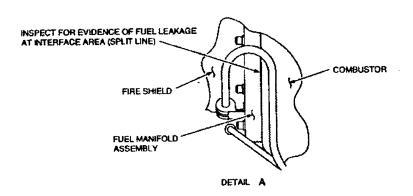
Fuel Manifold Assembly-to-Fire Shield Interface Area
